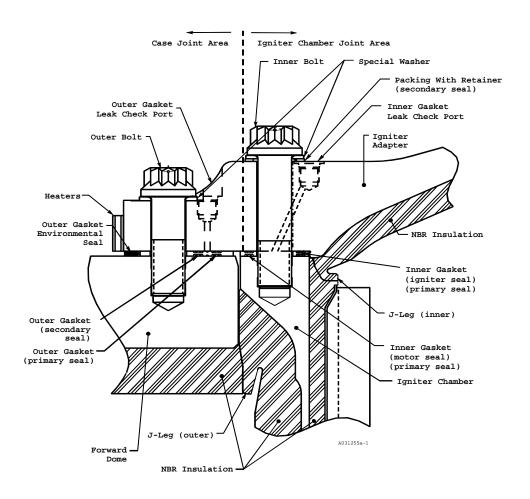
Igniter Adapter-to-Chamber Joint and Igniter Adapter-to-Case Joint
